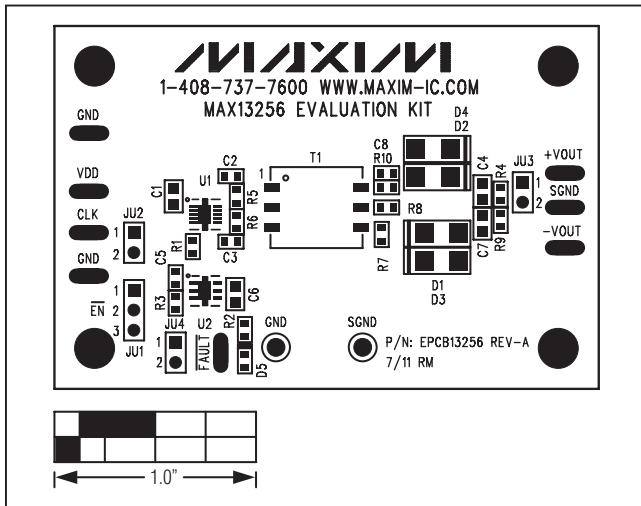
MAX13256 EV Kit Component Placement Guide—Component Side
